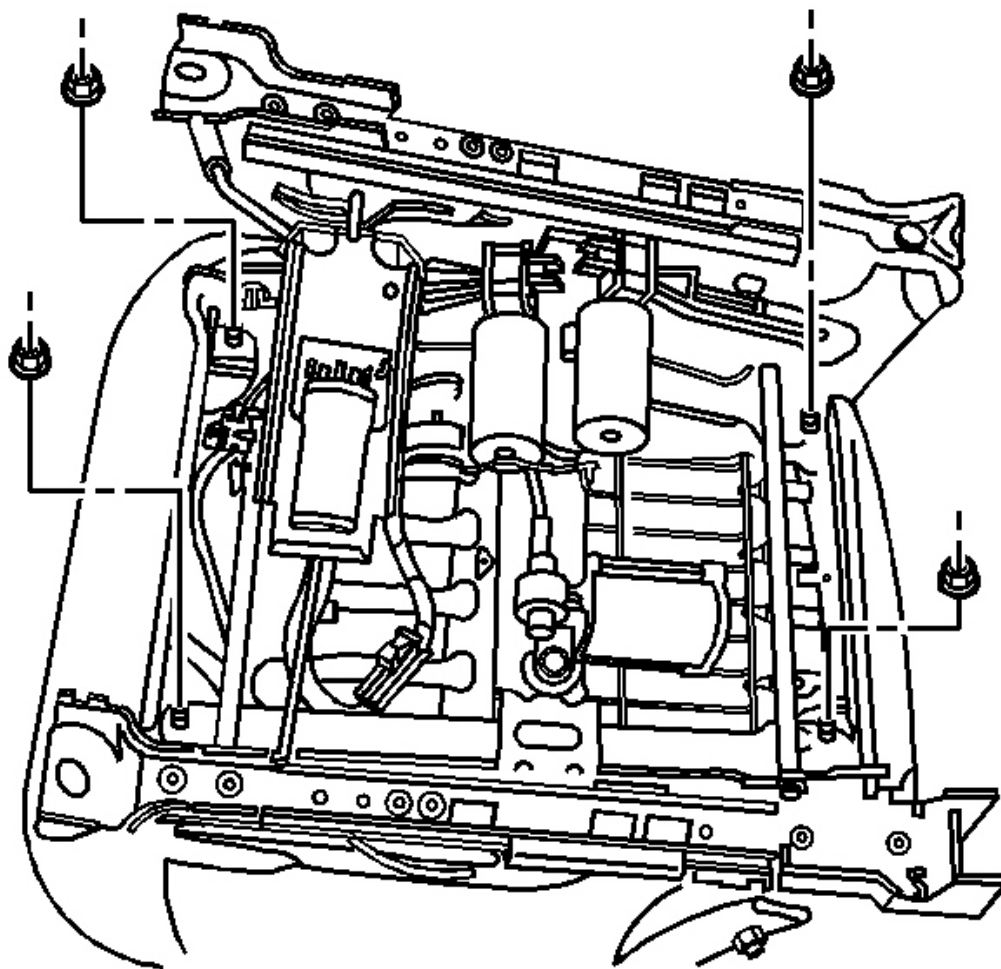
View Of Underside Of Seat Adjuster Frame & Mounting Nuts
